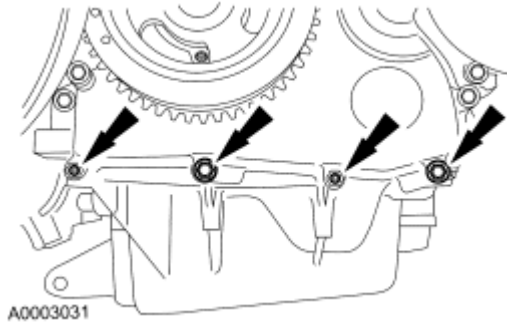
Locating Engine Front Cover-To-Oil Pan Bolts
